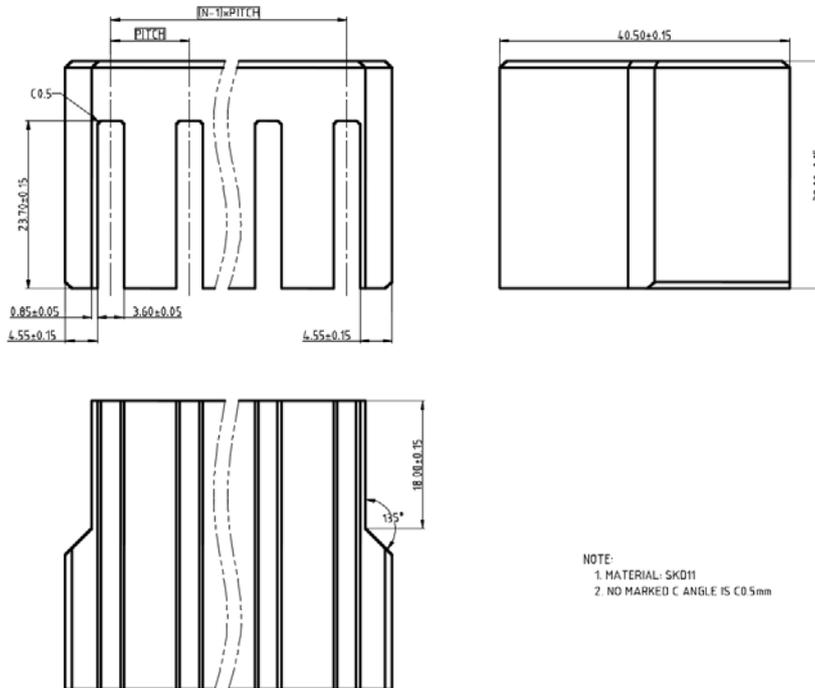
Orthogonal NF1/NGSFF connector application tools drawing
